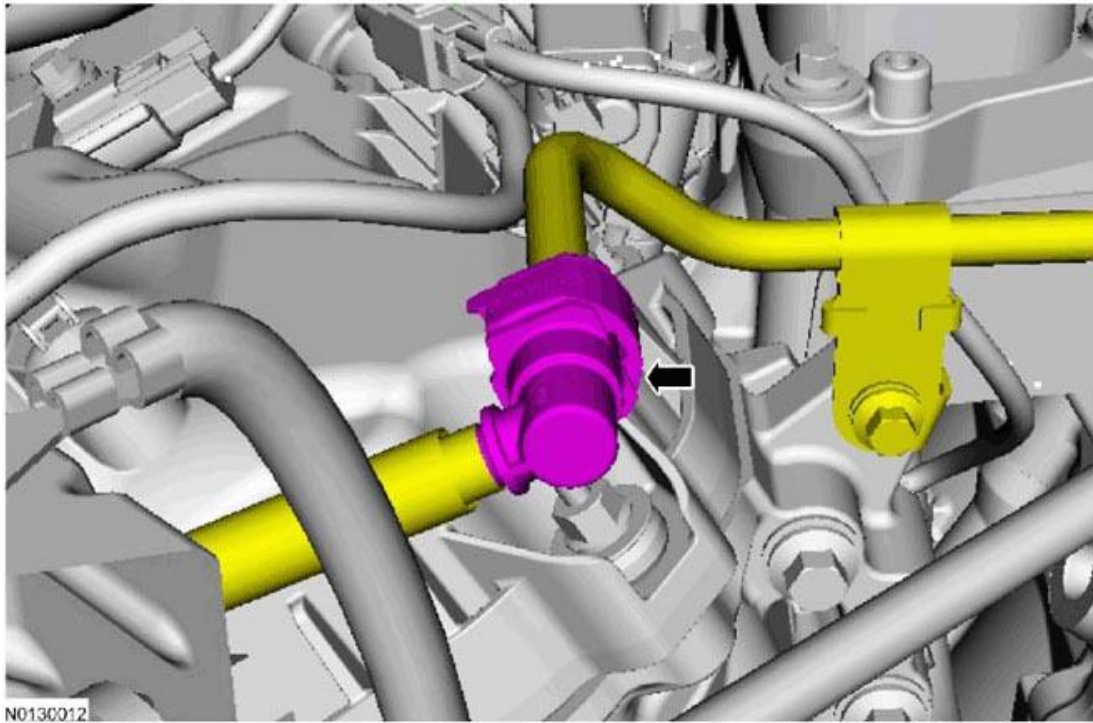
Locating CKP Sensor Bolts And 303-1521 Alignment Tool
